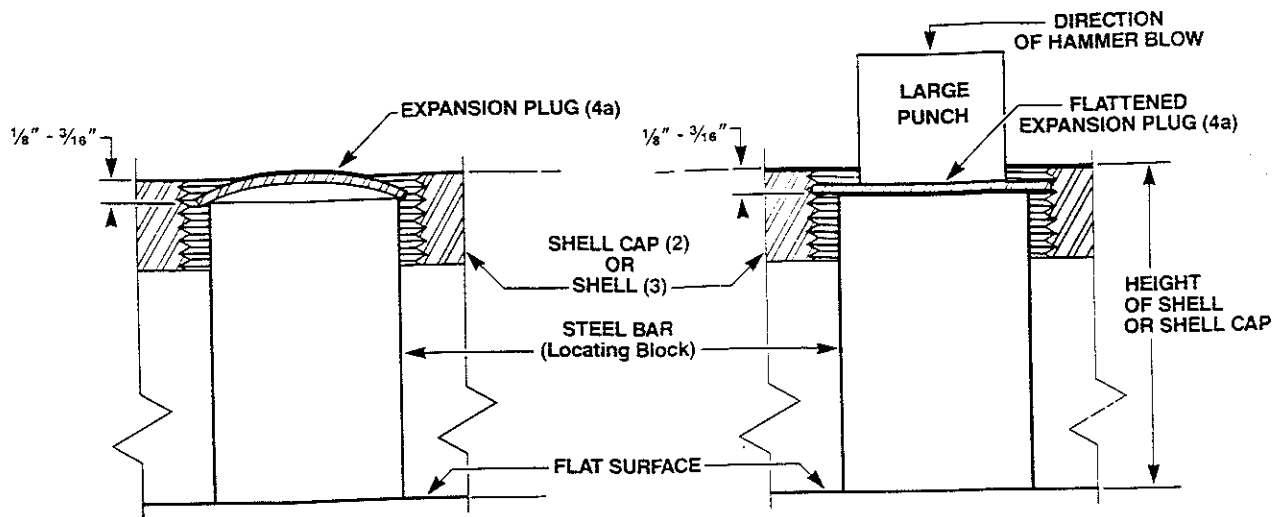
EXPANSION PLUG REPLACEMENT.
